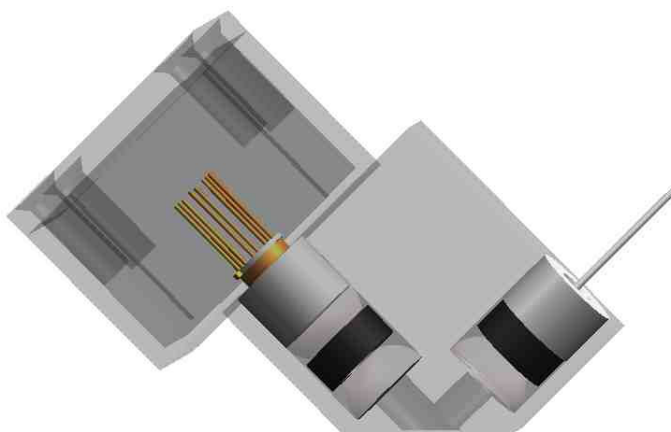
Draft view of the aluminium single channel detector holder
